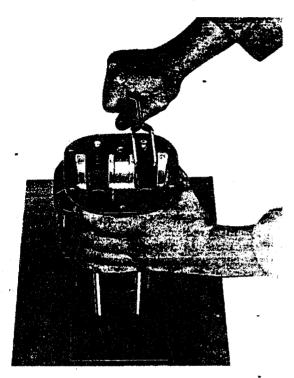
Compressing Valve Springs for Installation and Removal of Locks.
